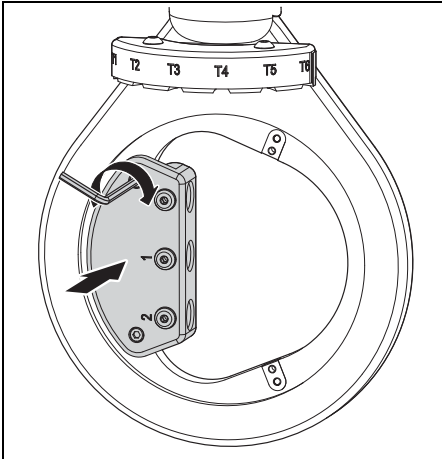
Ceramill Motion / Ceramill Motion 2 4X
